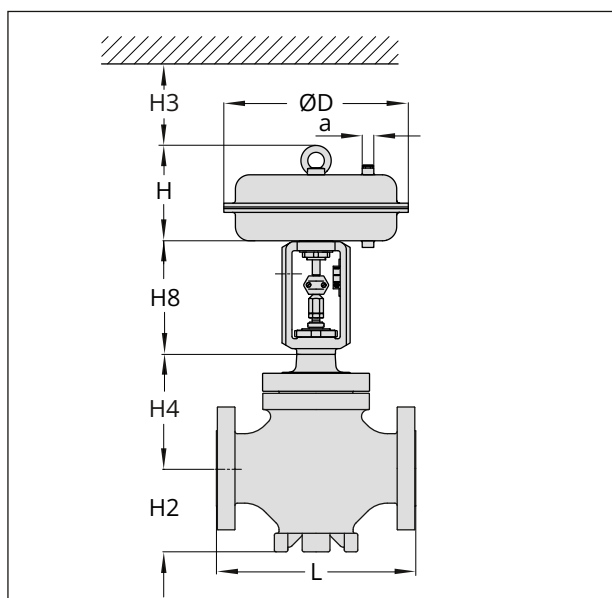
Type 3251-1 in DN 100/NPS 4 and larger (Type 3251 Valve with Type 3271 Pneumatic Actuator)
